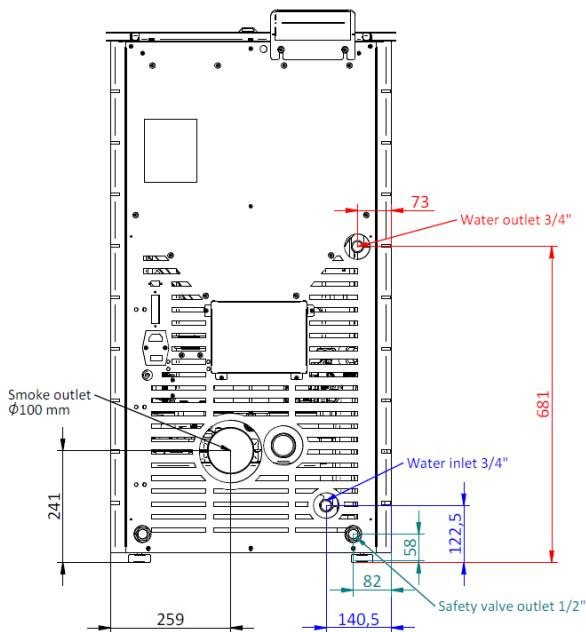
Dimensions of the free-standing pellet fire unit Hidro 23 (K2)
